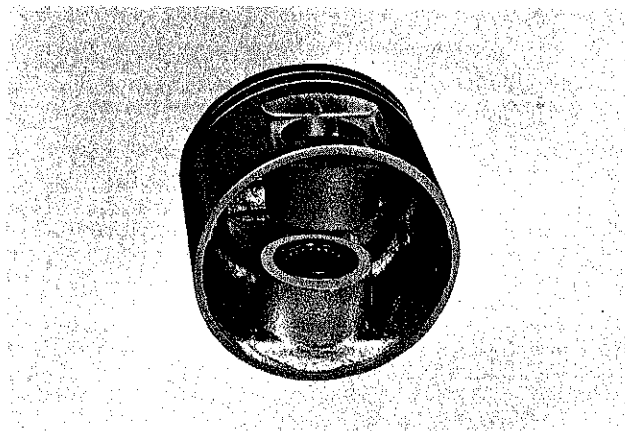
The inside edge of the piston pin bearing must be flush with the inside edge of the piston boss.
